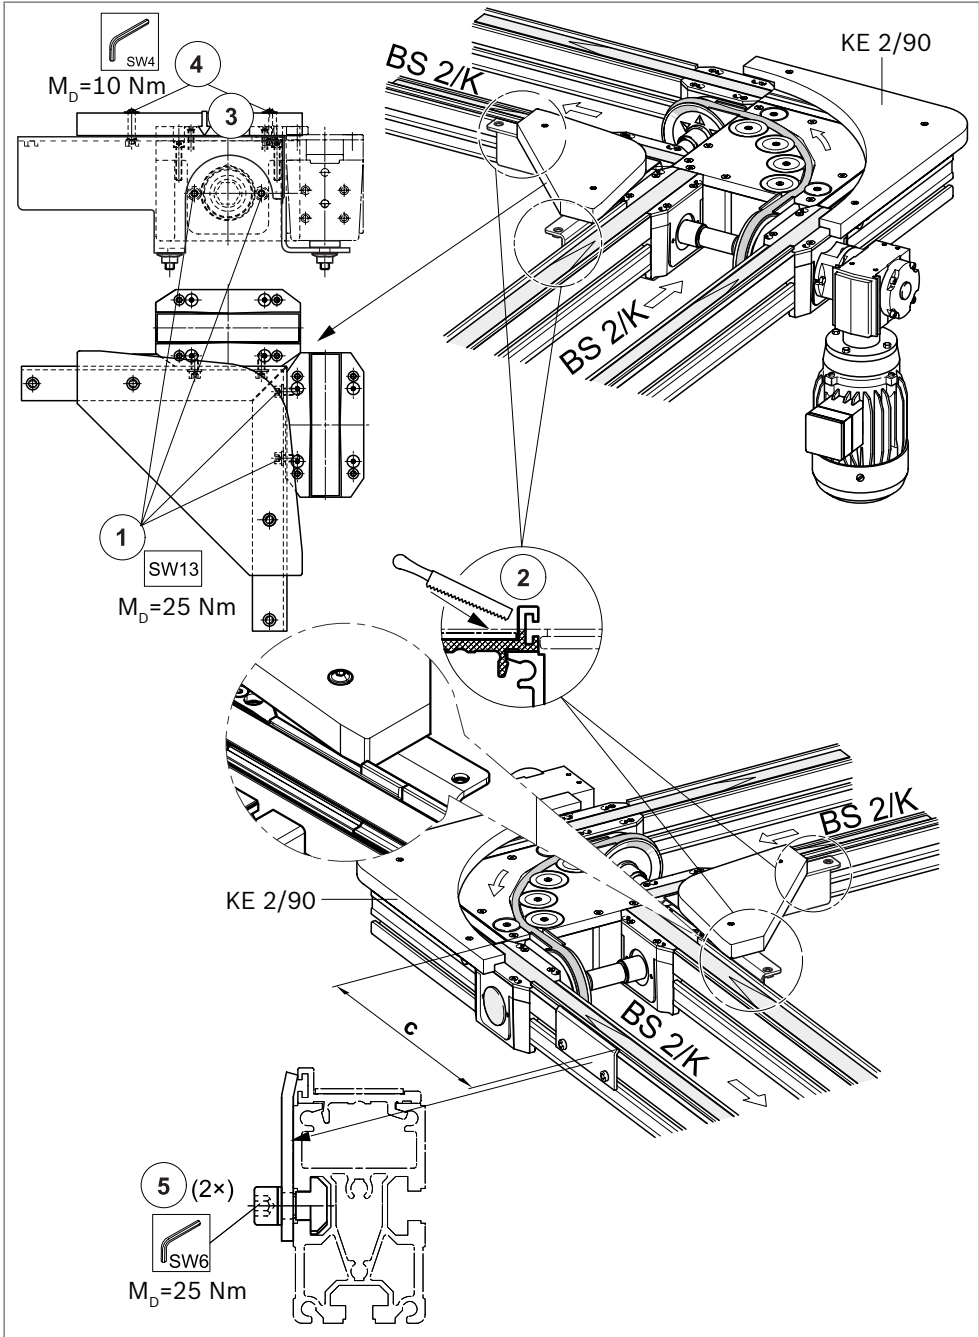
Installing KE 2/90-O on BS 2/K (7), inner guide
